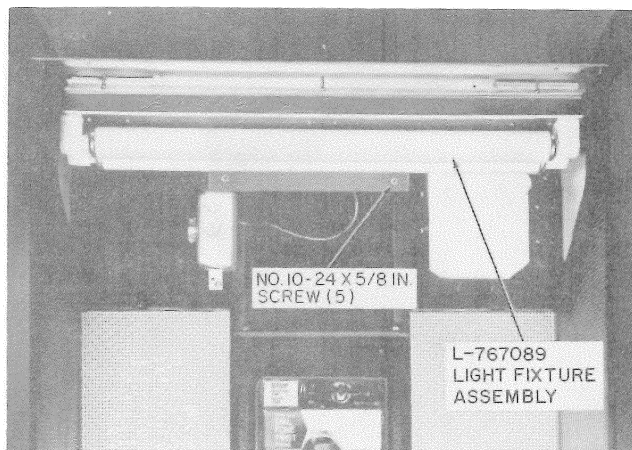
Removing L-767089 Light Fixture Assembly From List 32 Housing
